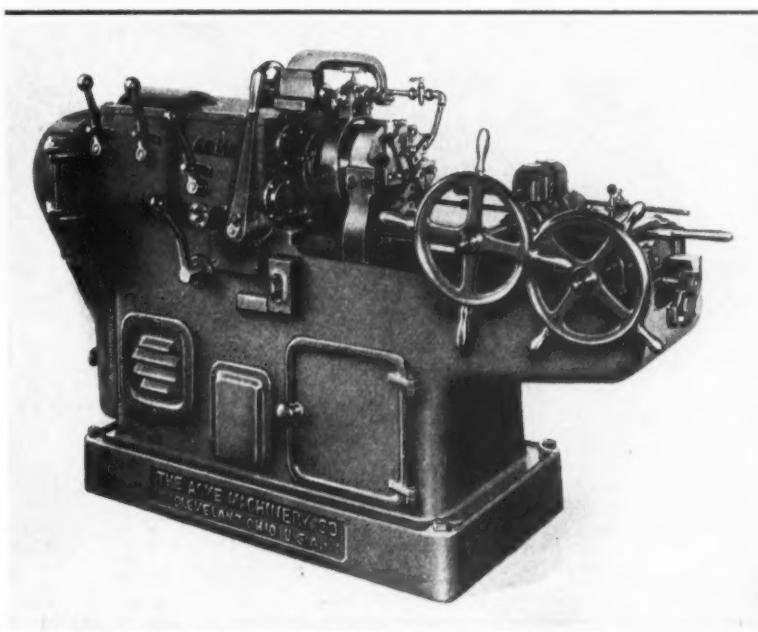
Acme Bolt-threading Machine with Handwheel Adjustment for Depth of Cut
